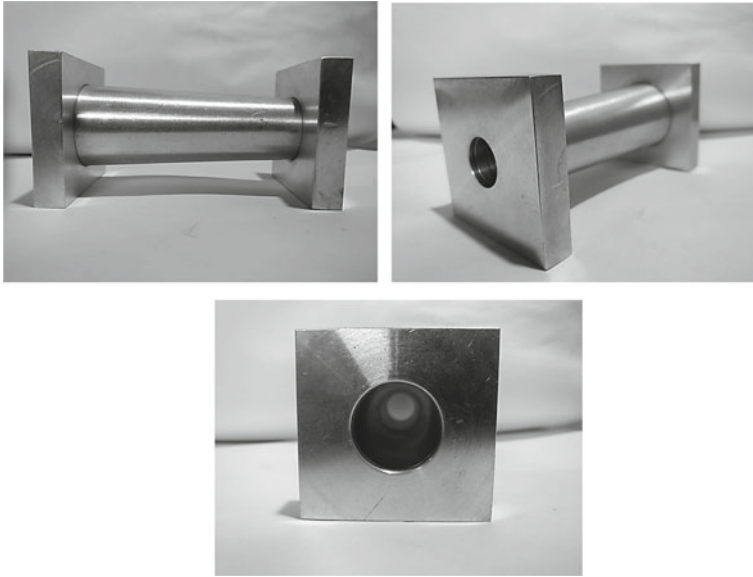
Cross-sectional and side views of designed tapered waveguide of dimensions: Initial radius—3.73 mm, Final radius—7.37 mm, Length—10 cm, Material—Aluminum
